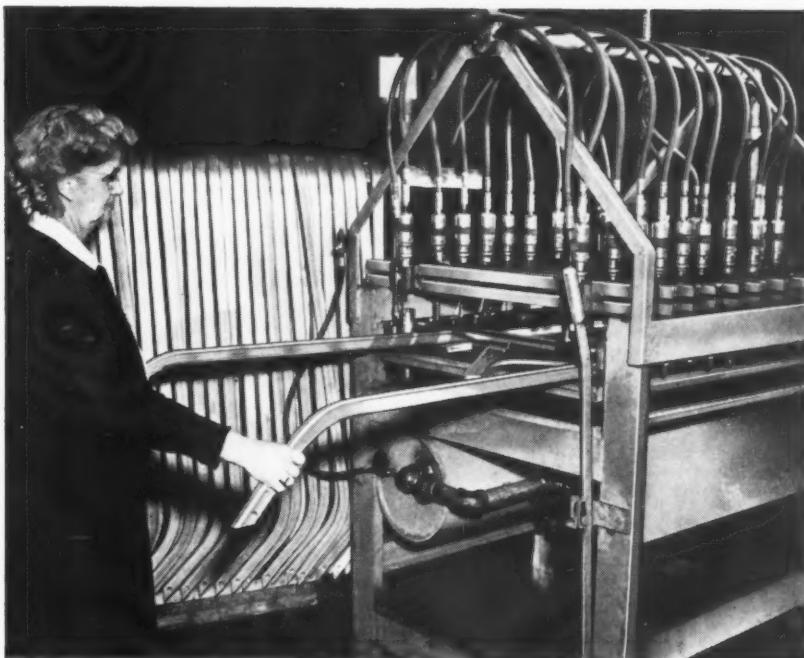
Formed aluminum furniture frames being lowered into a vapor degreaser to remove lubricant applied for the bending operation
